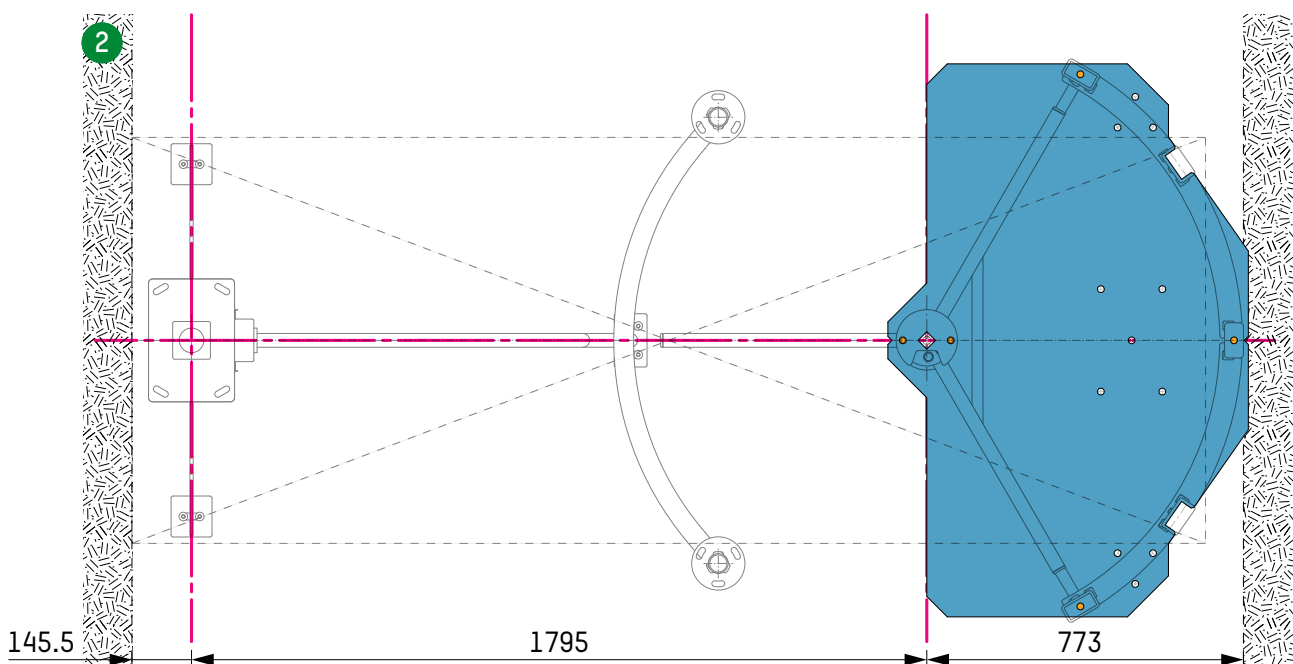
Drilling template (GAB-E-0113963) - Drawing TRS fixing points (Step 2)
